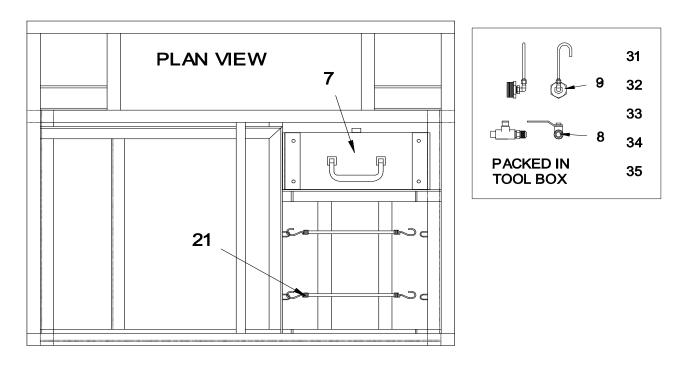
Skid Sub-Assembly, 4TP-4A SKID (Sheet 2 of 2).
